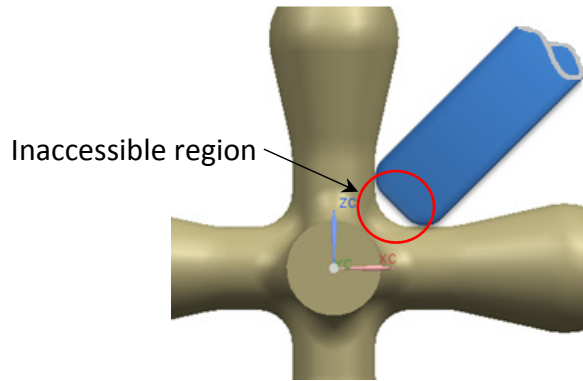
Limited accessible for bull nose end mill to cut the material
